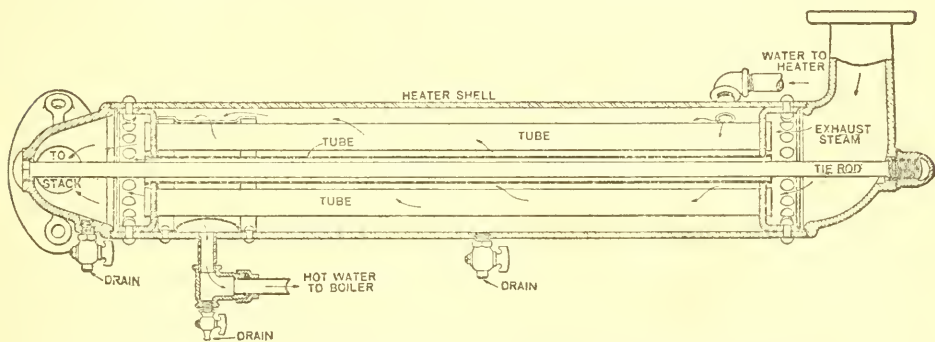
SECTIONAL VIEW OF "CASE" STEEL-SHELL HEATER.
